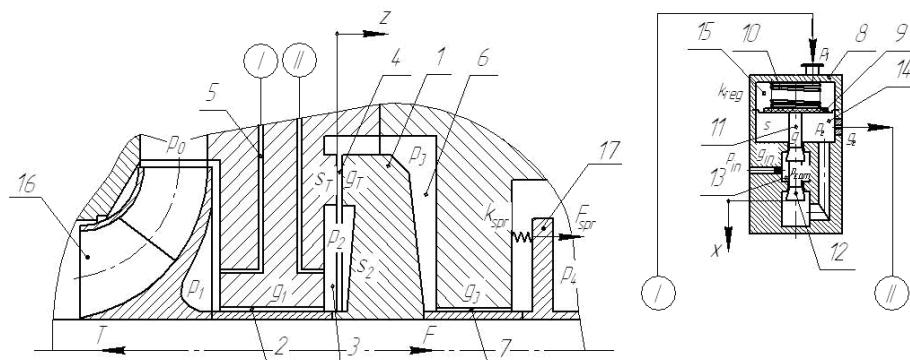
CARBD scheme: 1 – unloading disc; 2 – cylindrical gap; 3 – chamber on front of disc; 4 – face gap; 5 – pulse channel; 6 – chamber behind of disc; 7 – outlet axial gap; 8 – RPD housing; 9 – membrane; 10, 17 – spring elements; 11 – rod; 12 – valve head; 13 – RPD inlet chamber; 14, 15 – membrane chambers; 16 – last stage impeller
